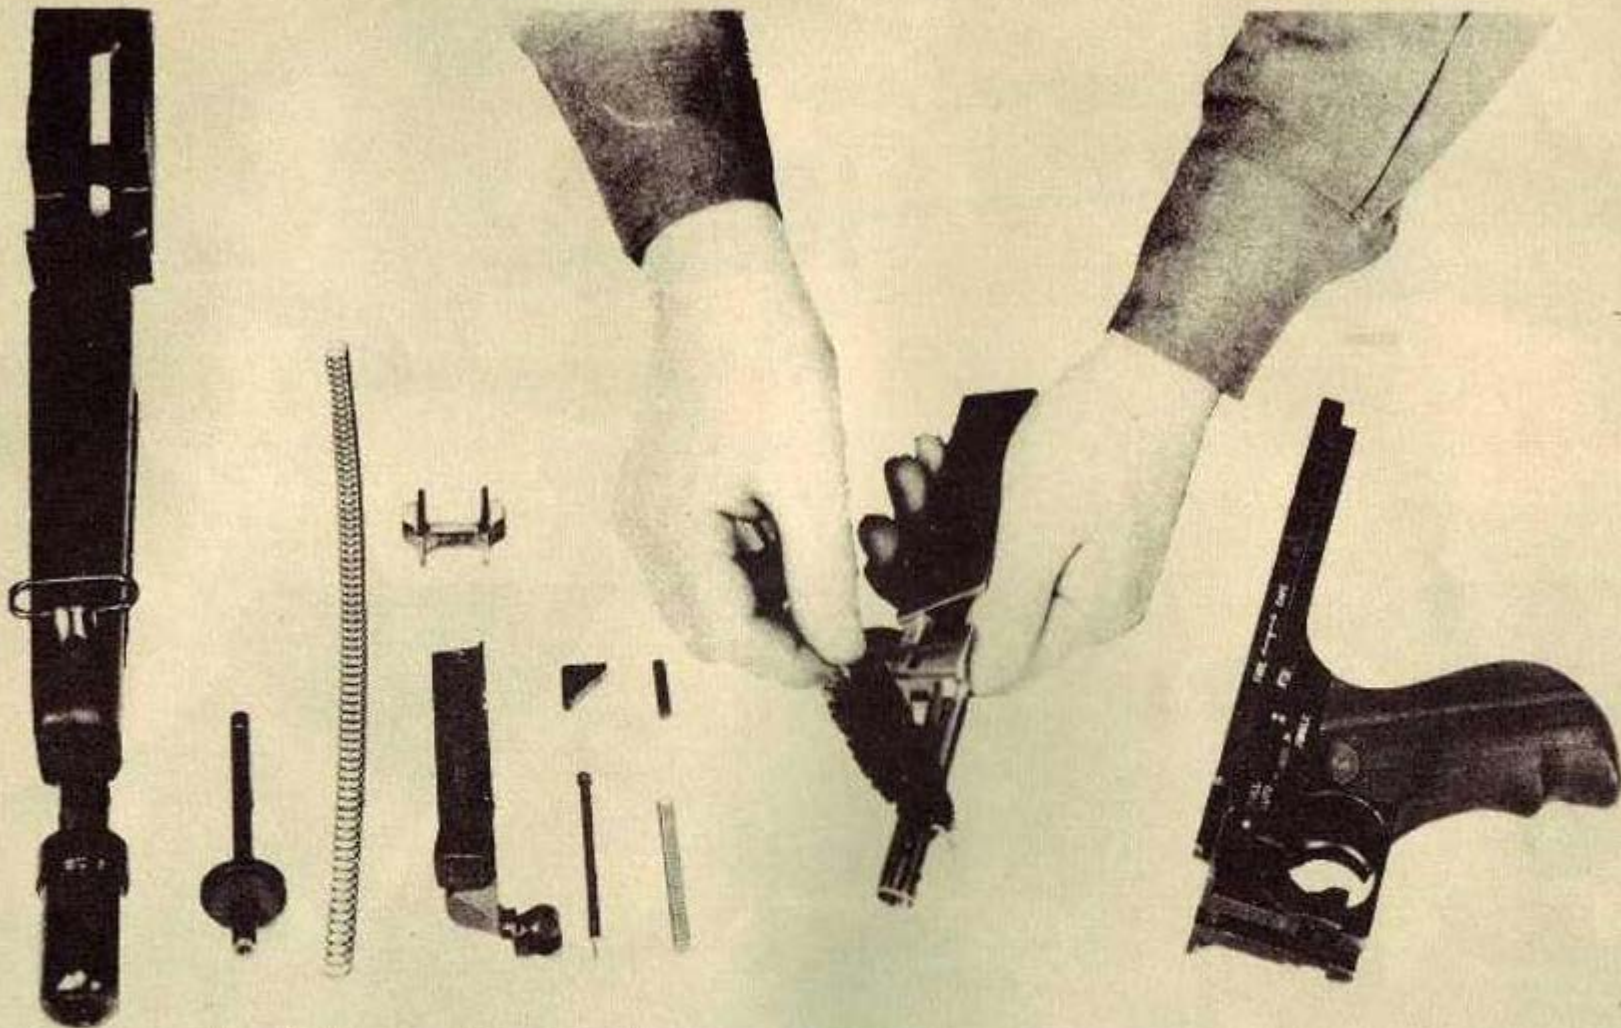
Keep the gun well cleaned and oiled. After each day's firing, clean the BORE, CHAMBER, and all parts and surfaces of the RECEIVER, BOLT, EJECTOR and EXTRACTOR that have been in contact with powder gasses. Remove FRAME from RECEIVER and take BOLT out; thoroughly clean the EXTRACTOR and front end of the BOLT. Escaping gasses usually manage to get into the FIRING PIN RECESS in the forward end of the BOLT; the RECESS, FIRING PIN and SPRING must, therefore, be thoroughly cleaned. The gun must be stripped to the extent shown in the illustration for the ordinary thorough cleaning after firing. All traces of the burnt gasses (usually a black stain) must be removed from the parts; the chamber brush is useful for this purpose.
